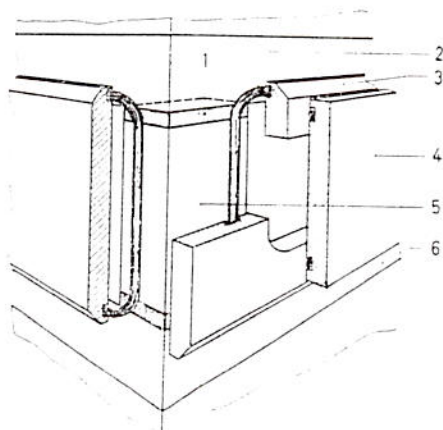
Corner of vacuum chamber, showing corner post sealed above and below by hard rubber sheet. The O-rings for the 595 cm long side plate and the 50 cm long end plate sealed onto the poles for their main length, then passed across the hard rubber to run vertically down the corner post. Stop-cock grease was used to improve the seal. This chamber could be mounted and demounted without disturbing the magnetic properties of the system. 1) Hard rubber; 2) O-ring; 3) long side plate (595 cm); 4) secondary side plate (90 cm) (6 each side); 5) corner piece; 6) pole.
